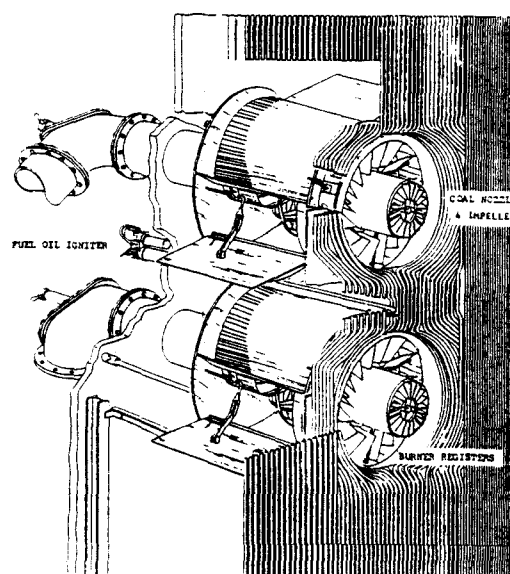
Burner arrangement showing new air registers and turbine blade style impeller.
